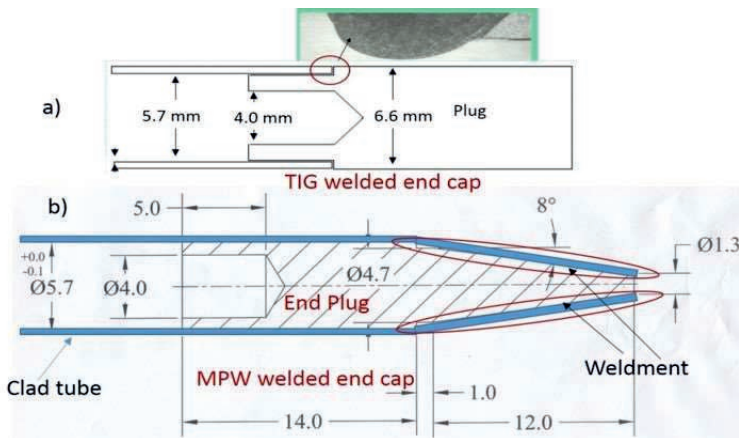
(a). TIG weld of fuel pin to end cap and (b). MP weld of fuel pin to end plug.
